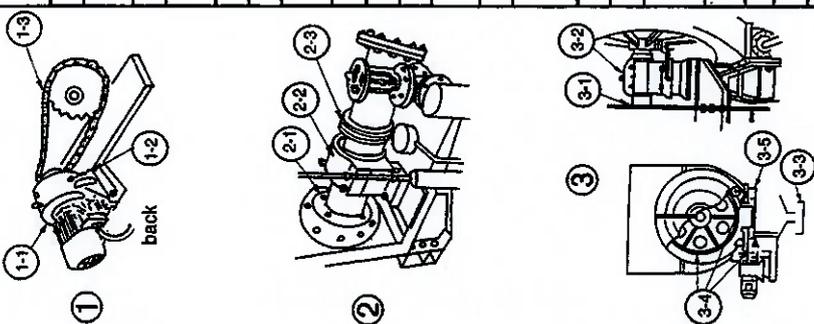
Sample of Provisional Cleaning, Checking, and Lubricating Standard
